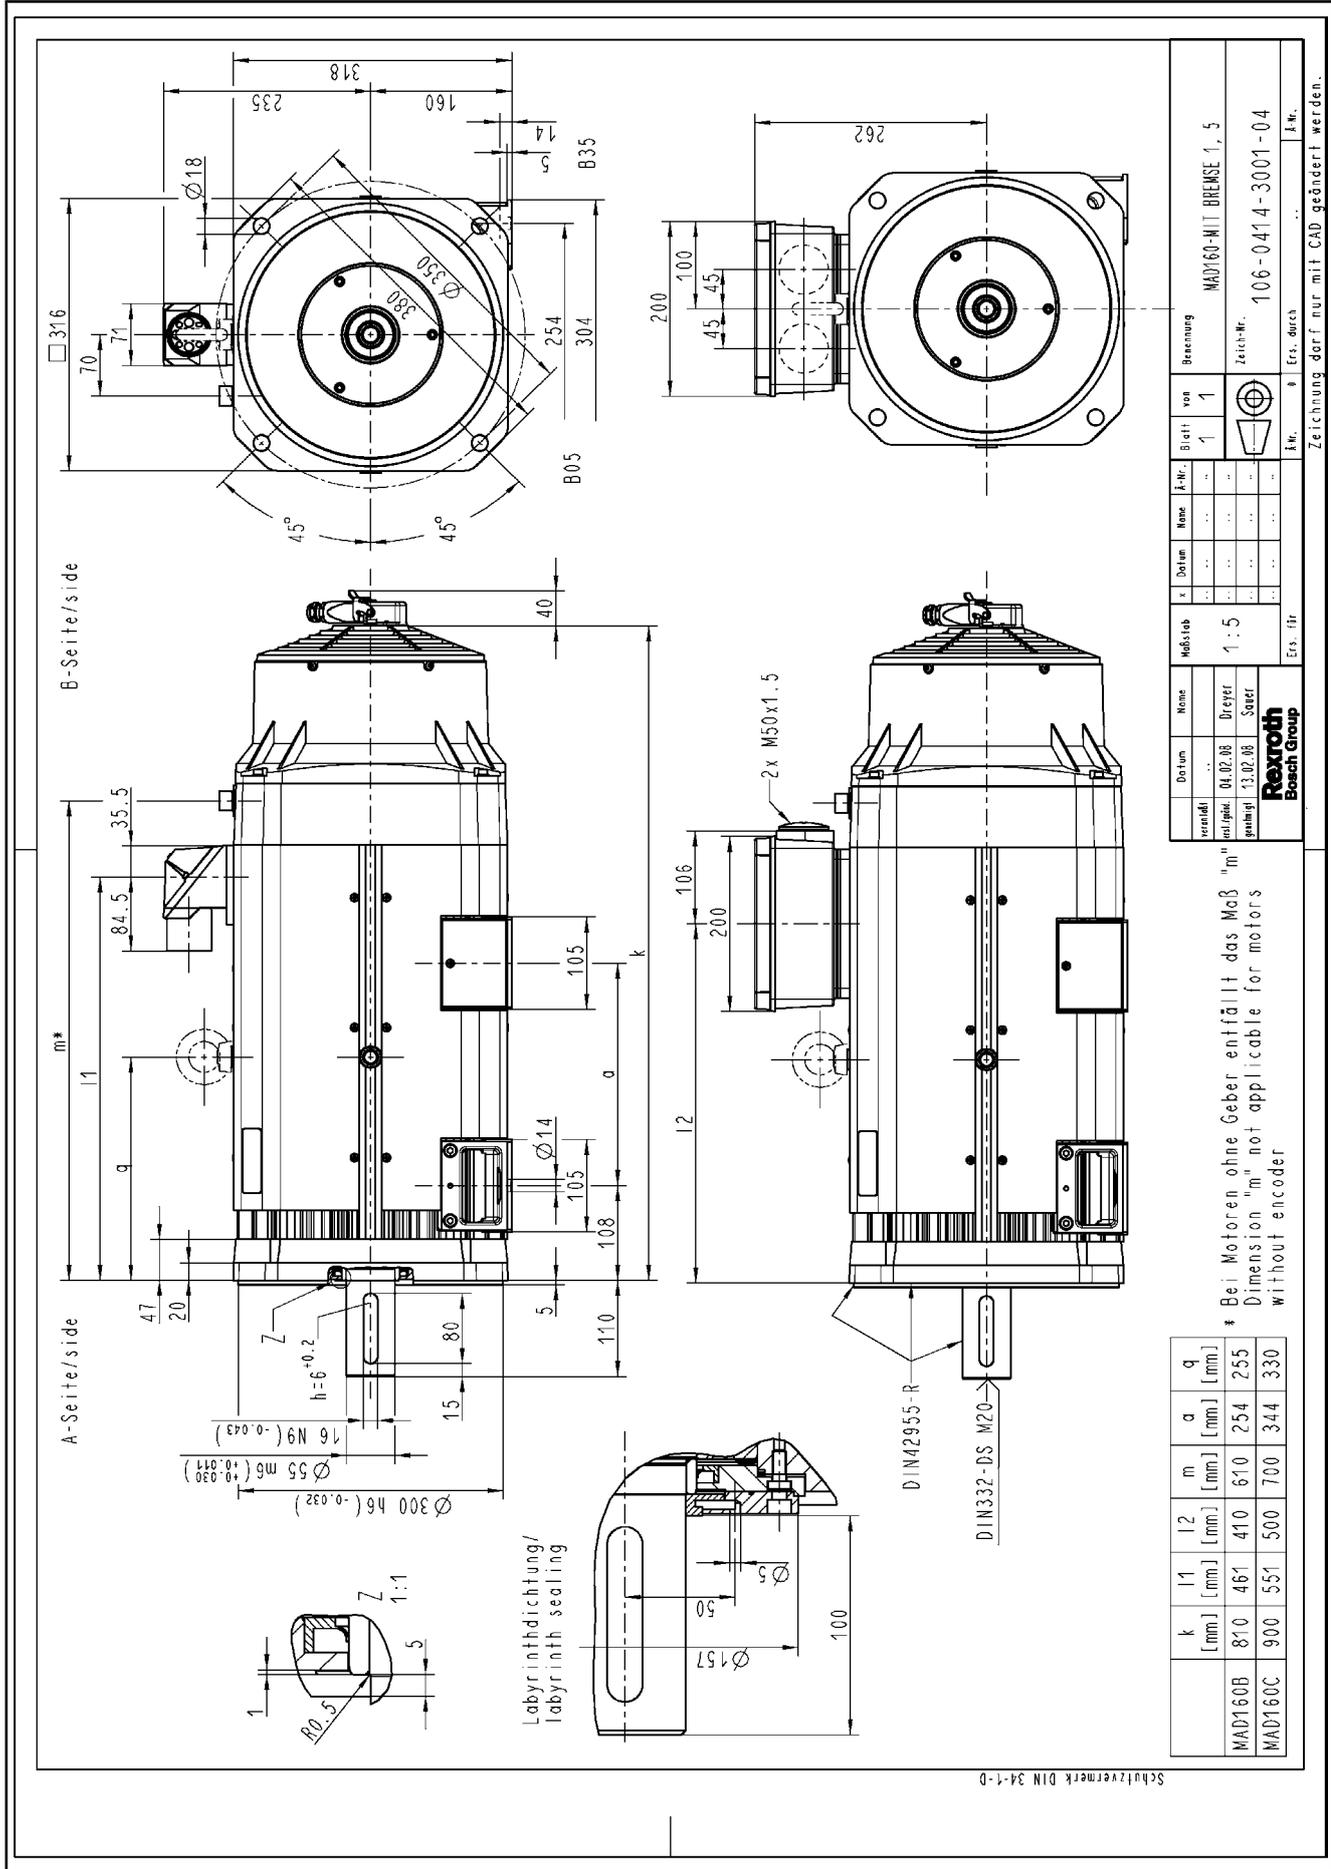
Dimension sheet MAD160 with brake 1/5
